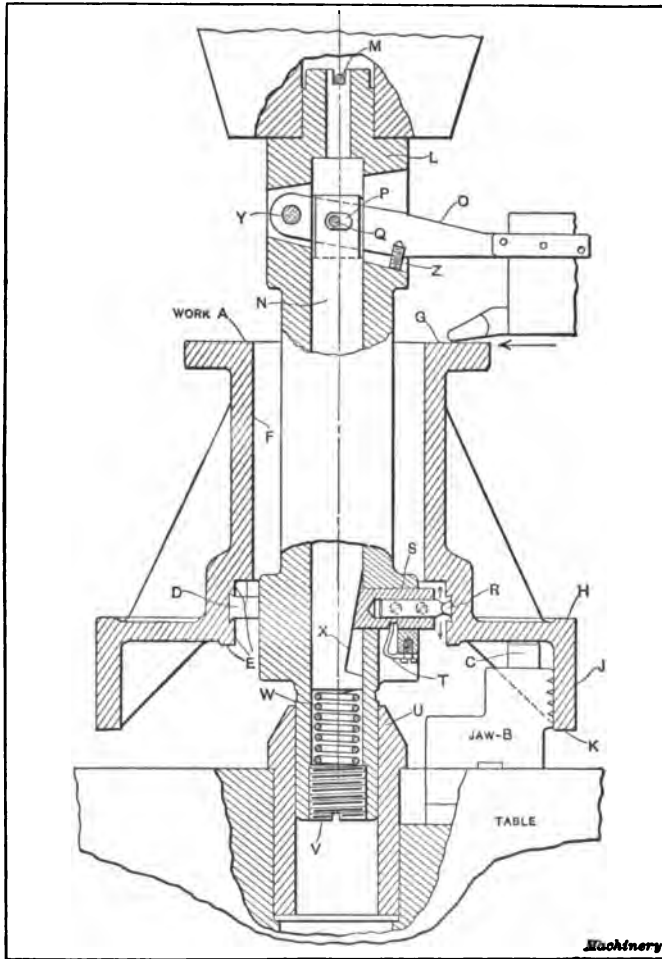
A Recessing Tool Cutting a Dovetail-shaped Recess
